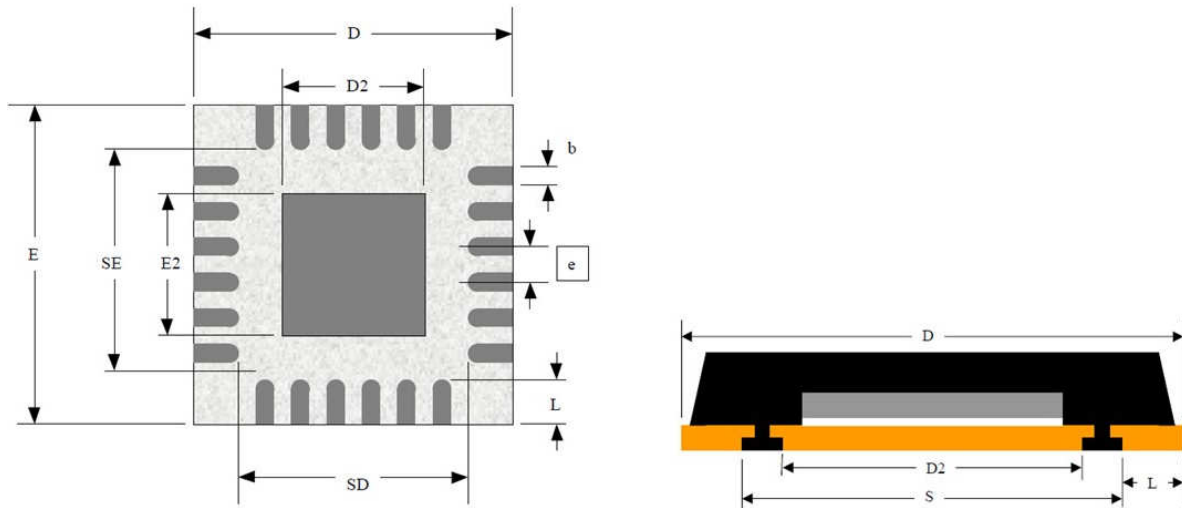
MLF® (full lead design) component dimensions needed for PCB land pattern design [21].
